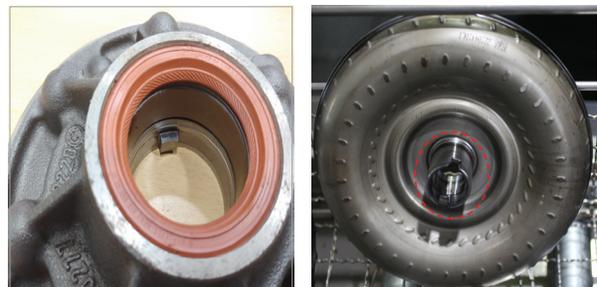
Bushing pressed into the oil pump(left), Impeller hub(right)
